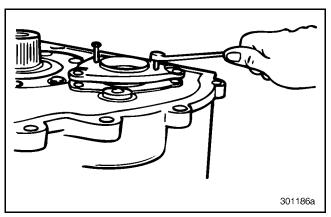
Removing No. 2 Front Countershaft Rear Bearing Cover
